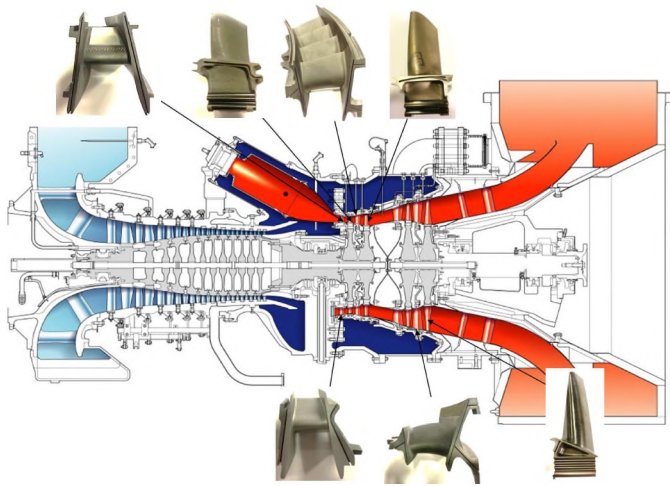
Industrial gas turbine components machined using EDM (courtesy of Siemens Industrial Turbomachinery).
